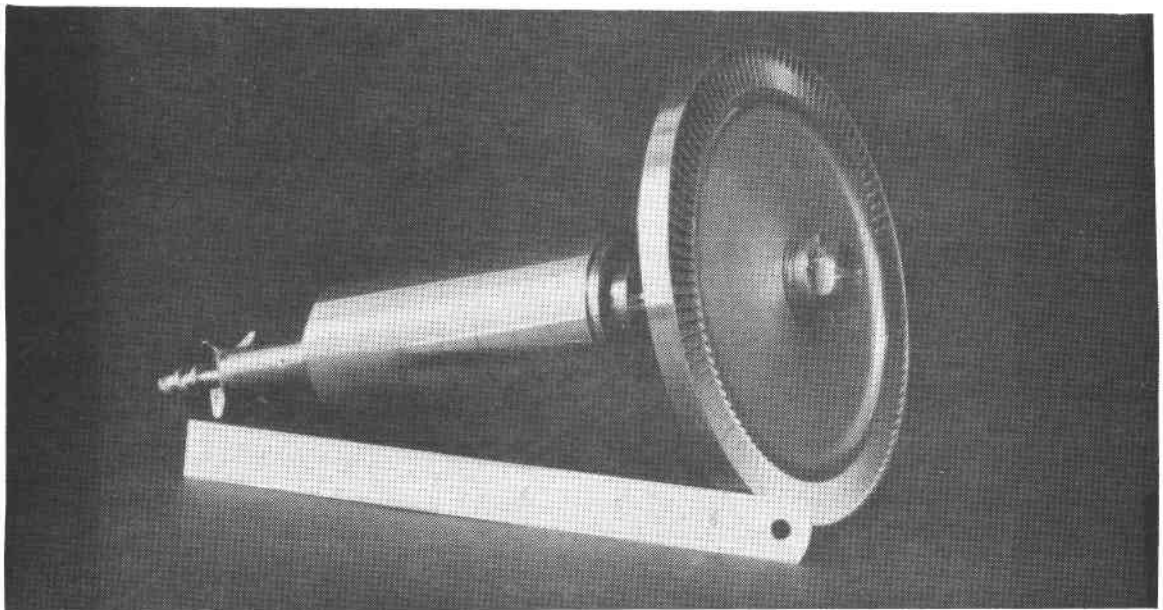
ROTATING SHAFT WITH PUMP, ALTERNATOR AND TURBINE WHEEL
